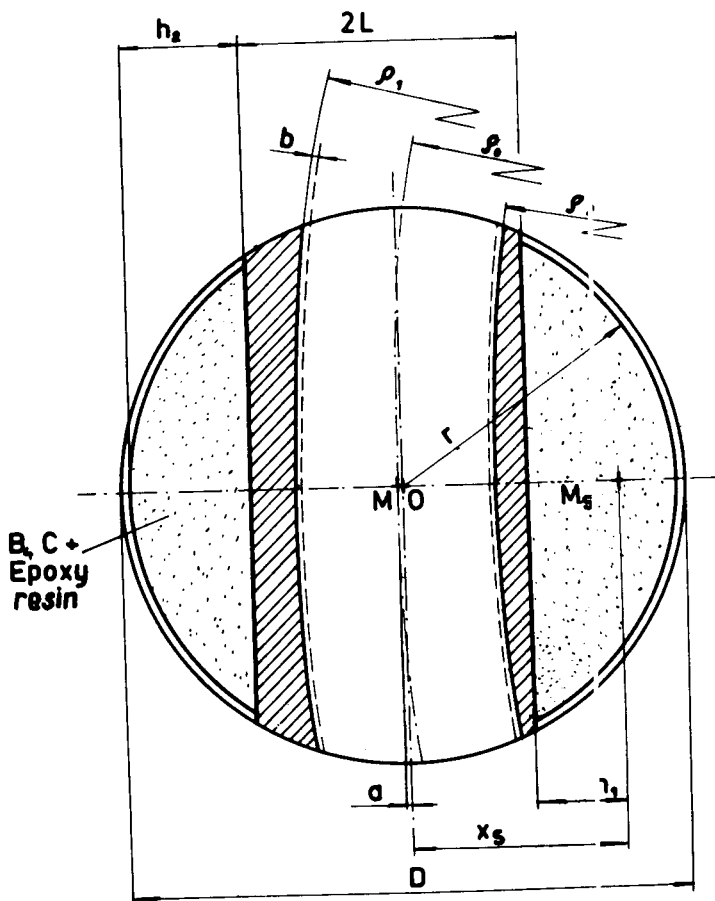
Perpendicular to the rotation axis section of the rotor.
